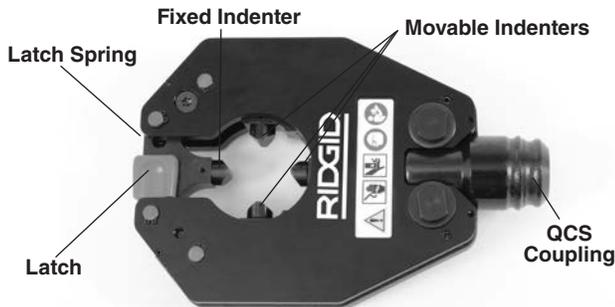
4P-6 4PIN Dieless Crimp Head (interchangeable version)
